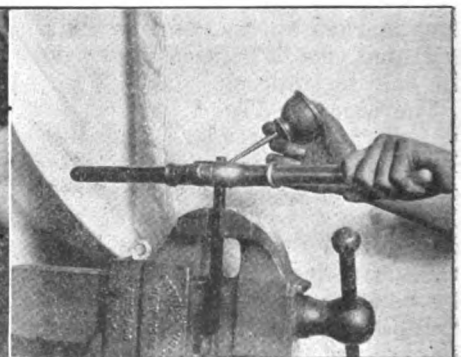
THE DIE SHOULD BE LUBRICATED WHEN CUTTING THE THREAD
